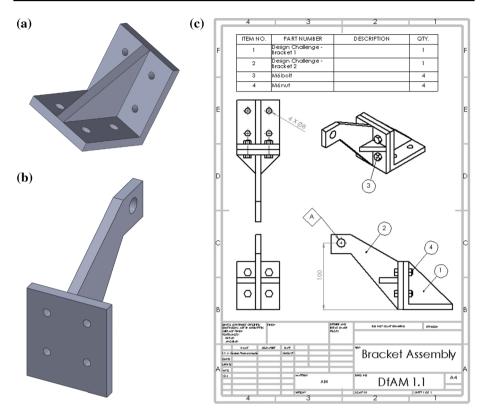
Baseline CAD models of the two interfacing parts to be redesigned for FDM manufacturing; a Bracket 1, b Bracket 2 and c engineering drawing of the assembly including the functional dimensions
